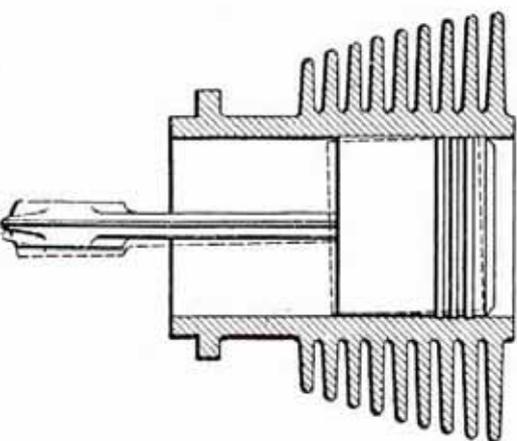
CHECKING CONNECTING-ROD ALIGNMENT USING OLD CYLINDER.
